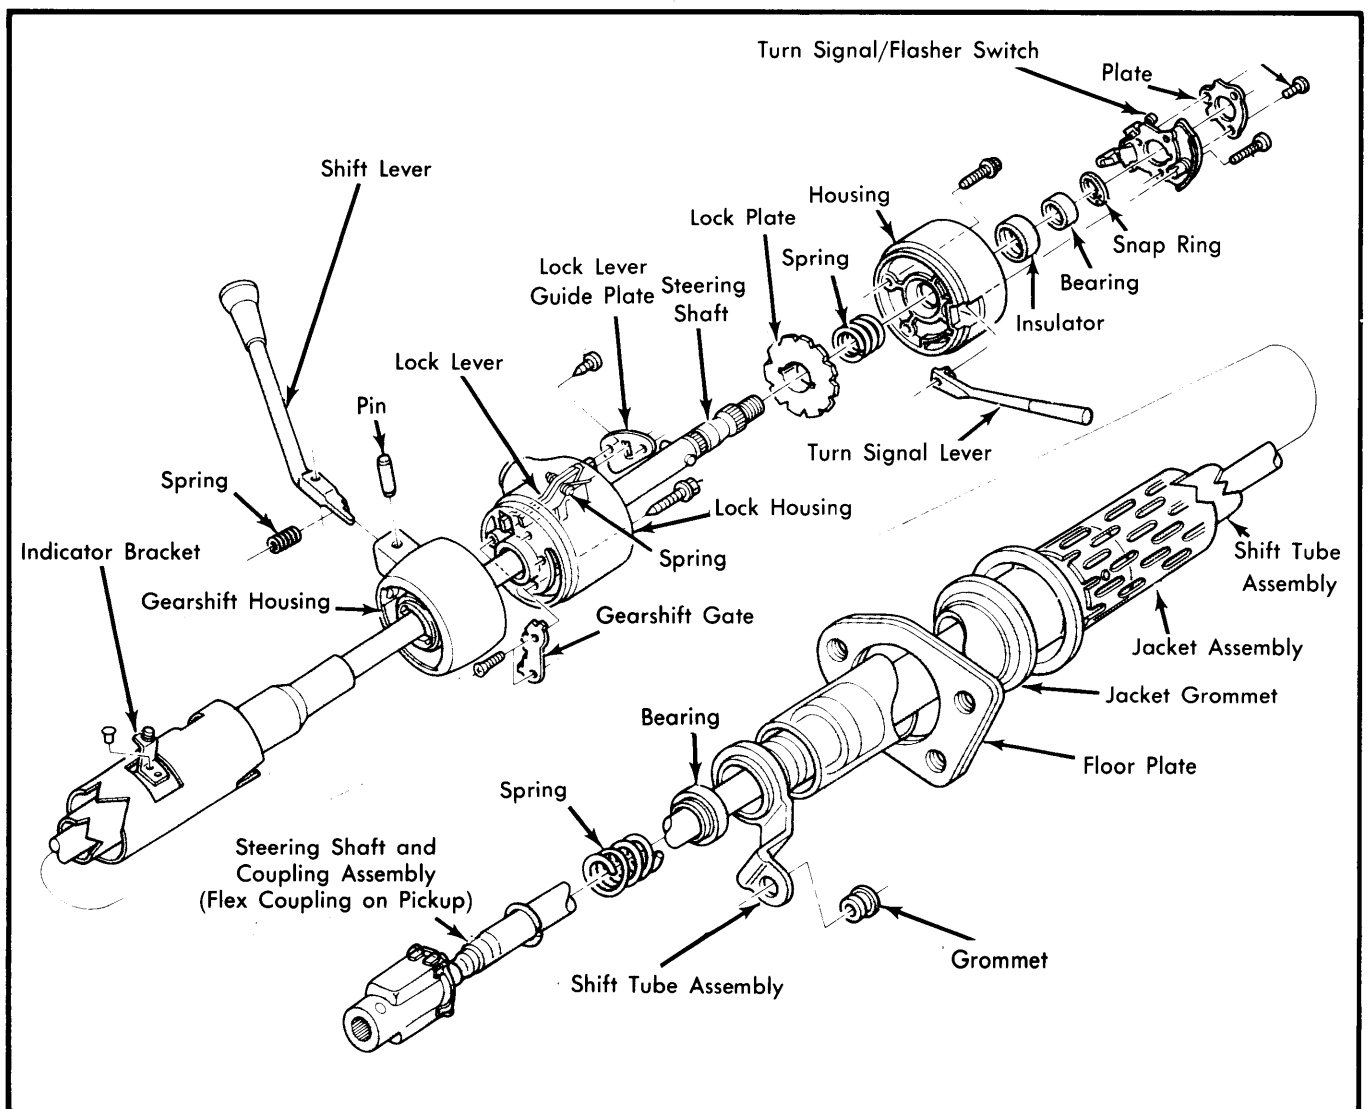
Exploded View of Automatic Transmission Steering Column
